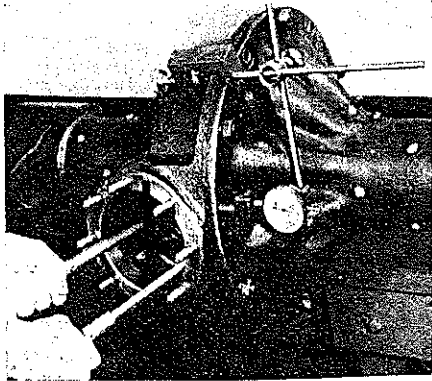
Checking differential and gear end play with dial indicator through thrust block pin hole
